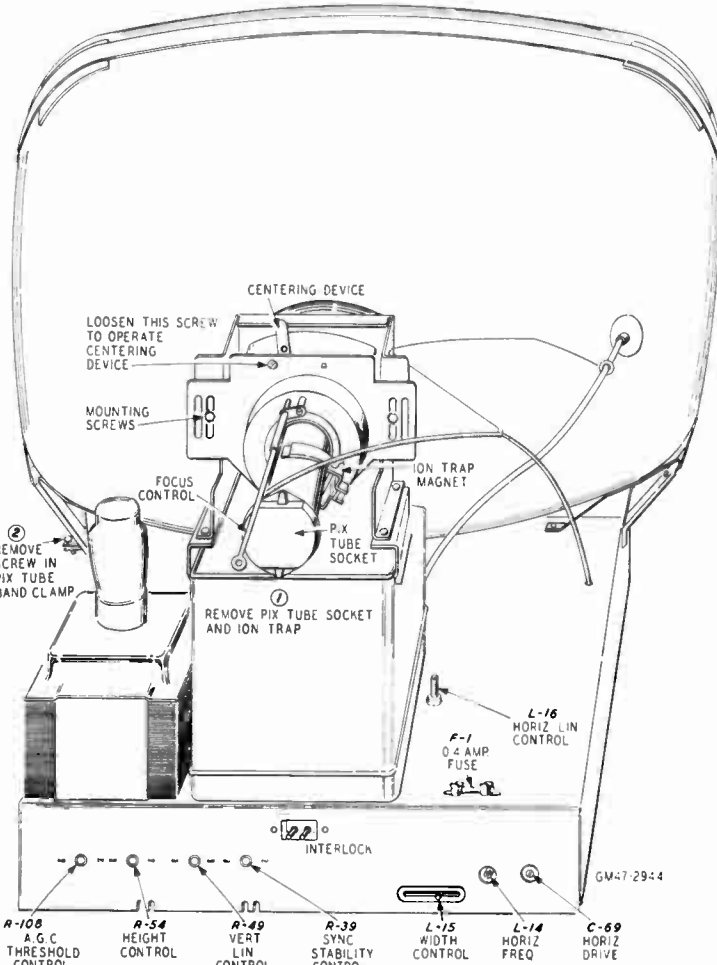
Removal of Picture Tube and Rear Chassis Controls
